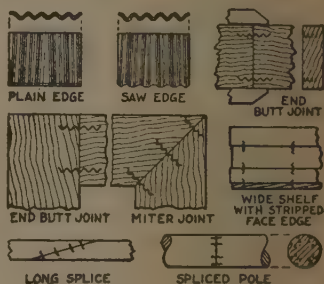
Methods of making joints with corrugated fasteners, which are hammered into the wood.
